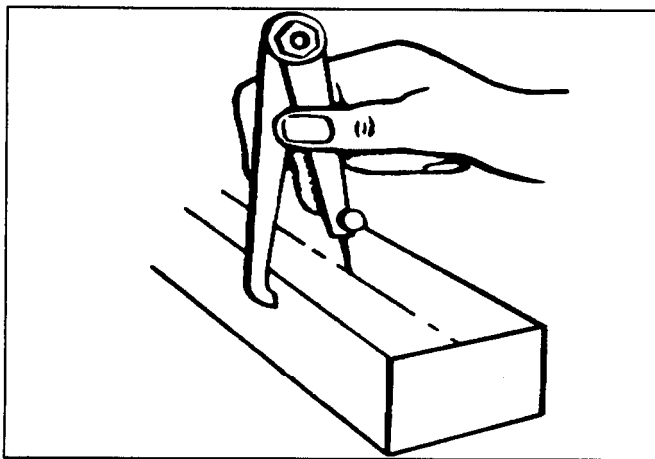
Laying out lines parallel to the edge of workpiece.
